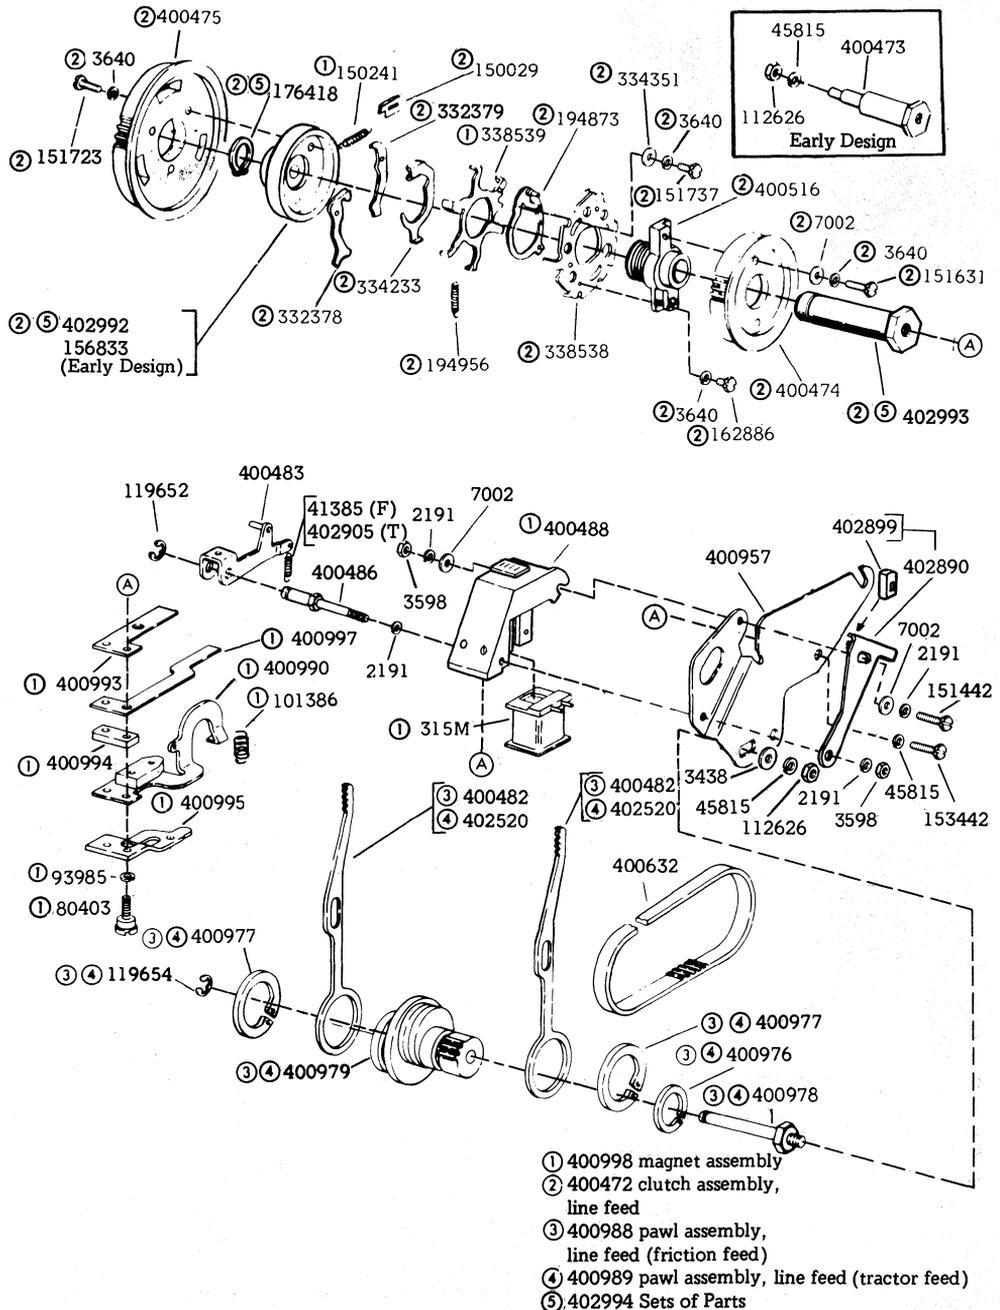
400470 Line Feed Assembly (Friction Feed) and 402621 Line Feed Assembly (Tractor Feed - 80 and 132-Column)
